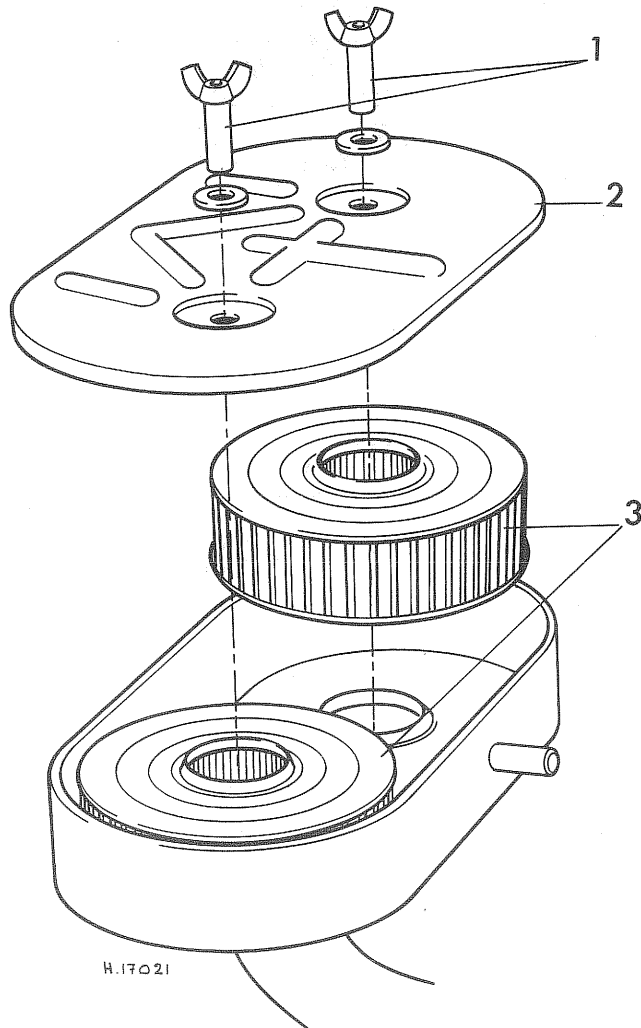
The Cooper S air cleaner assembly (Sec 2)
